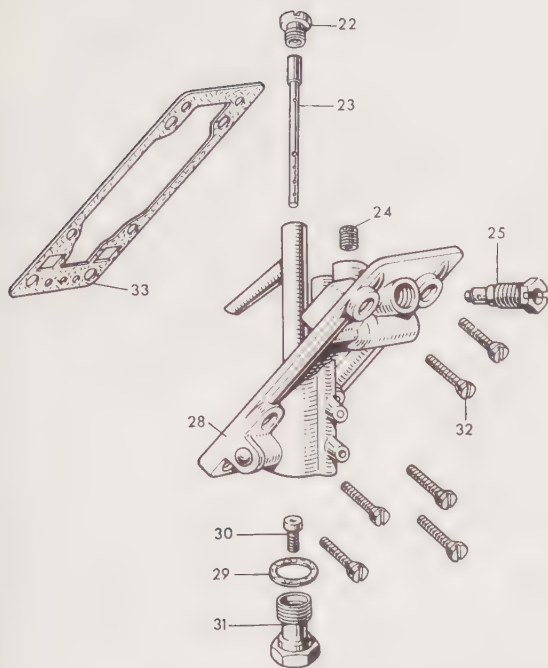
14 Jet block and components, Solex type B321H carburettor. (For part numbers refer to Fig 2:13.)
